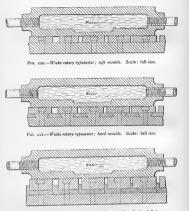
Wicks rotary typecaster; angle-base moulds. Scale: full size. Sections of Wicks moulds and top cover showing arrangement for water-circulation and the different methods of mould construction adopted.
